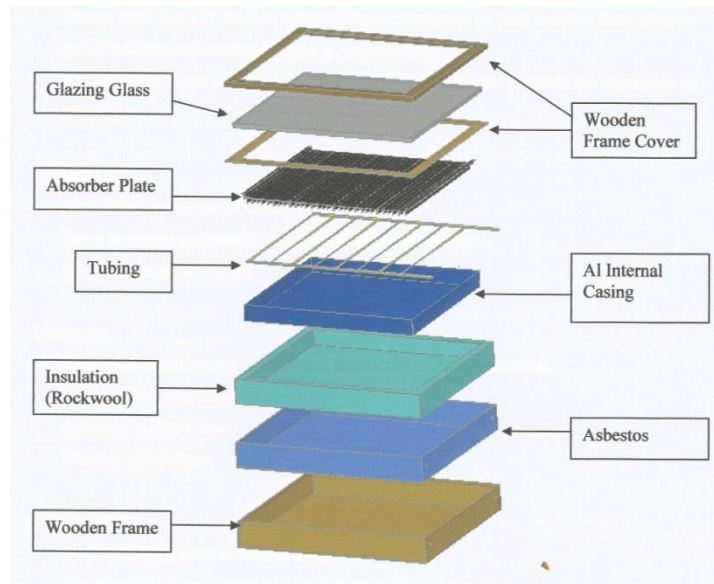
Exploded View of Solar Collector (Kit, January 2009)
